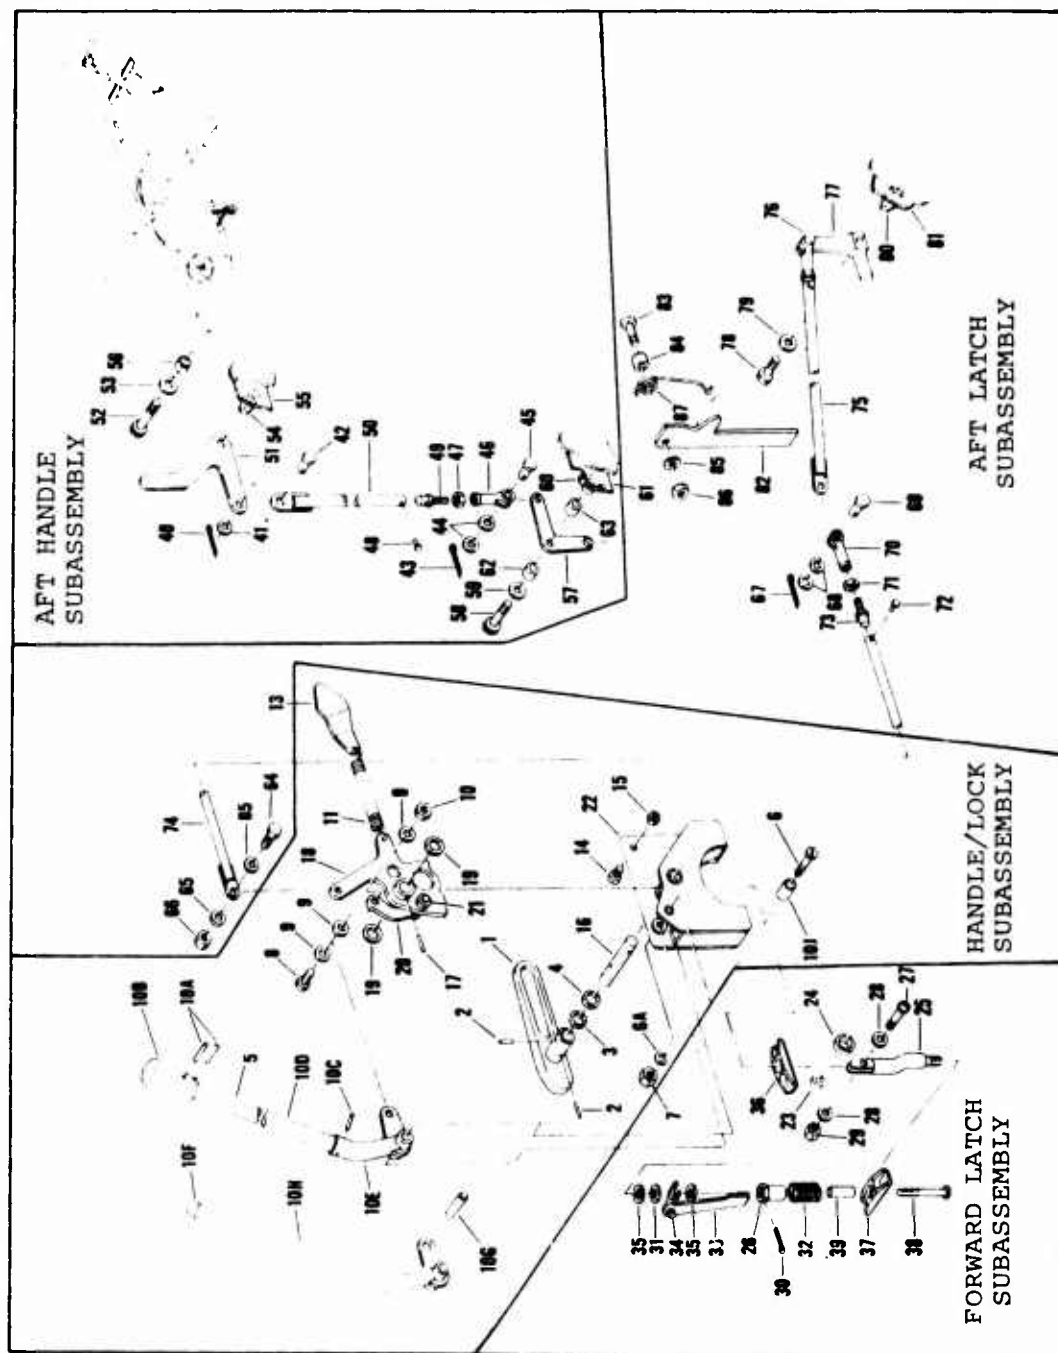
Parts Breakdown, Handle/Latch Assembly.
